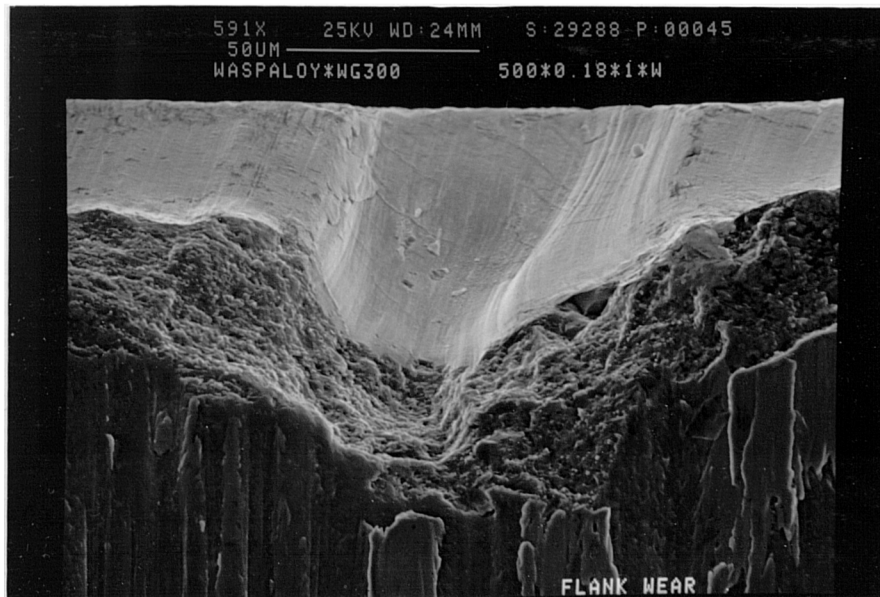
Magnified view of figure 66 showing the smooth and rough surfaces
